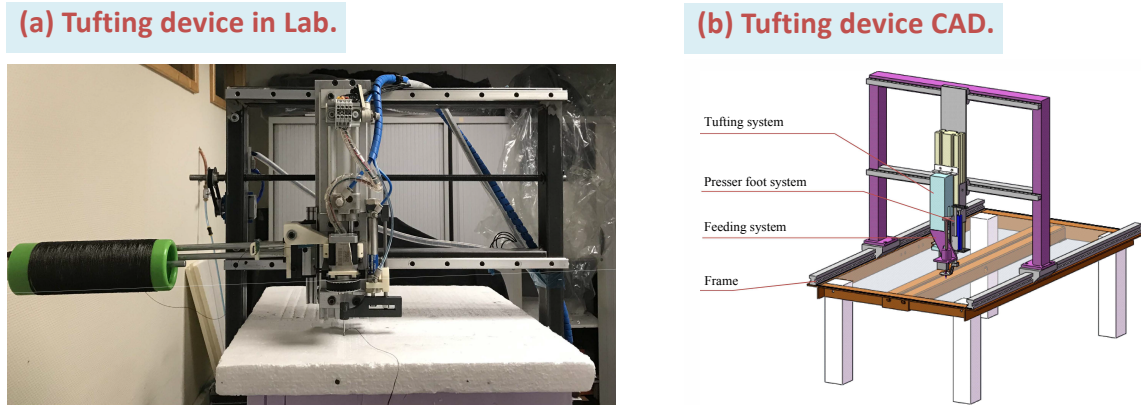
Tufting device (a) using in GEMTEX Lab. and (b) CAD version [29].
